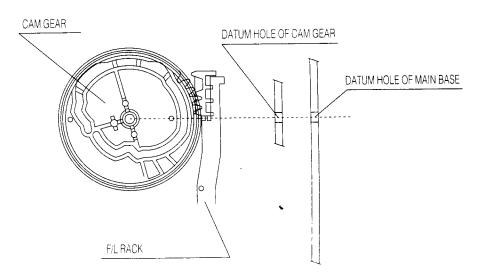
DATUM POSITION OF F/L RACK & CAM GEAR
